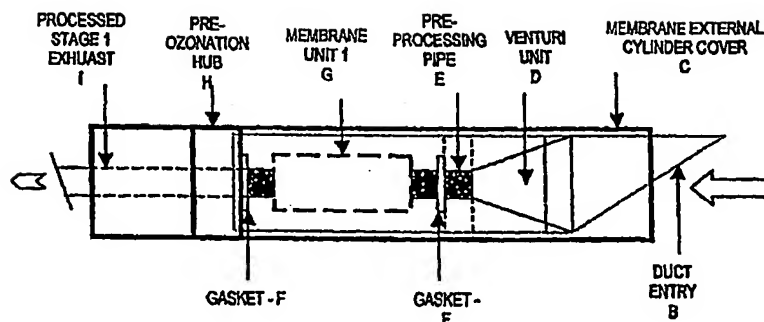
illustrates the construction of a valve assembly incorporated with a suitable reverse osmosis membrane for processing of seawater (stage 1) in a typical reverse osmosis process
